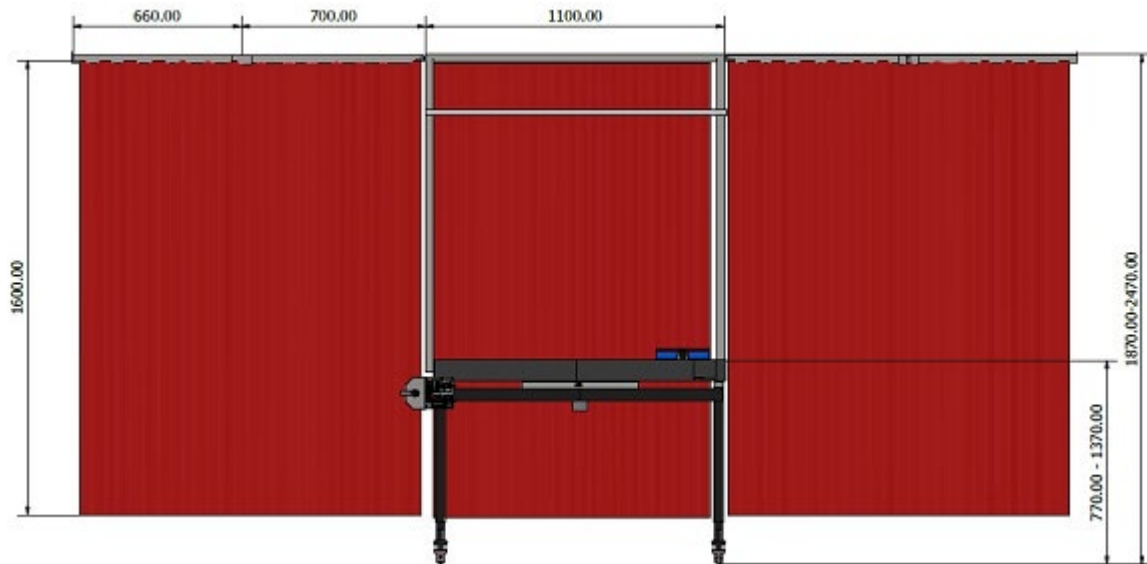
Basic dimensions of the welding table (main view)
